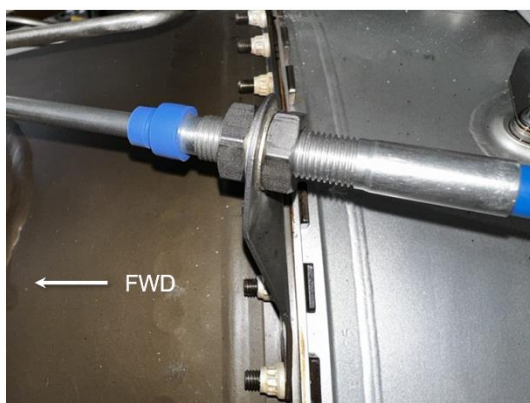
Cable mounting bracket fittings, located on the flange of the reduction gearbox
